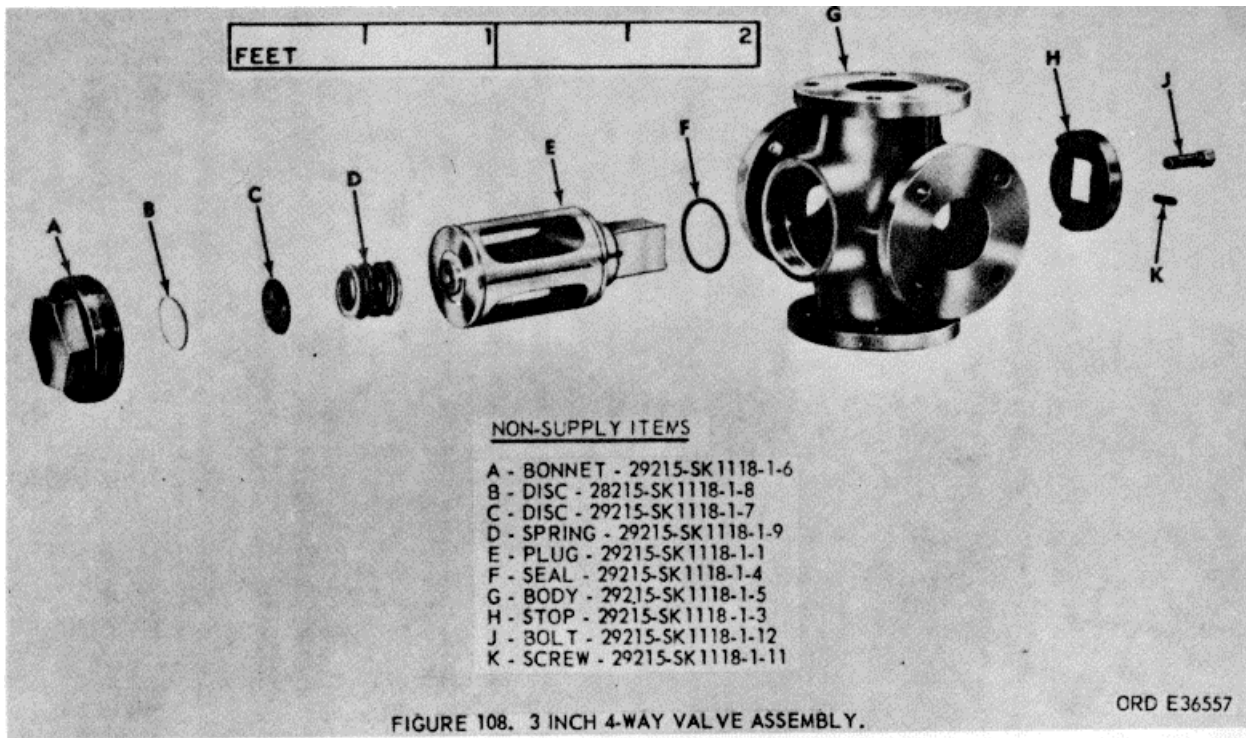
3 INCH 4-WAY VALVE ASSEMBLY.
